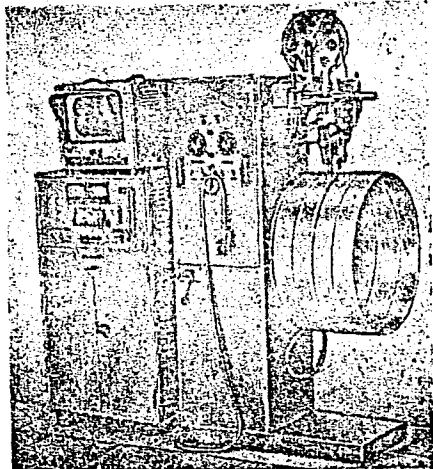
The ASG-2 unit for welding with remote television control.
